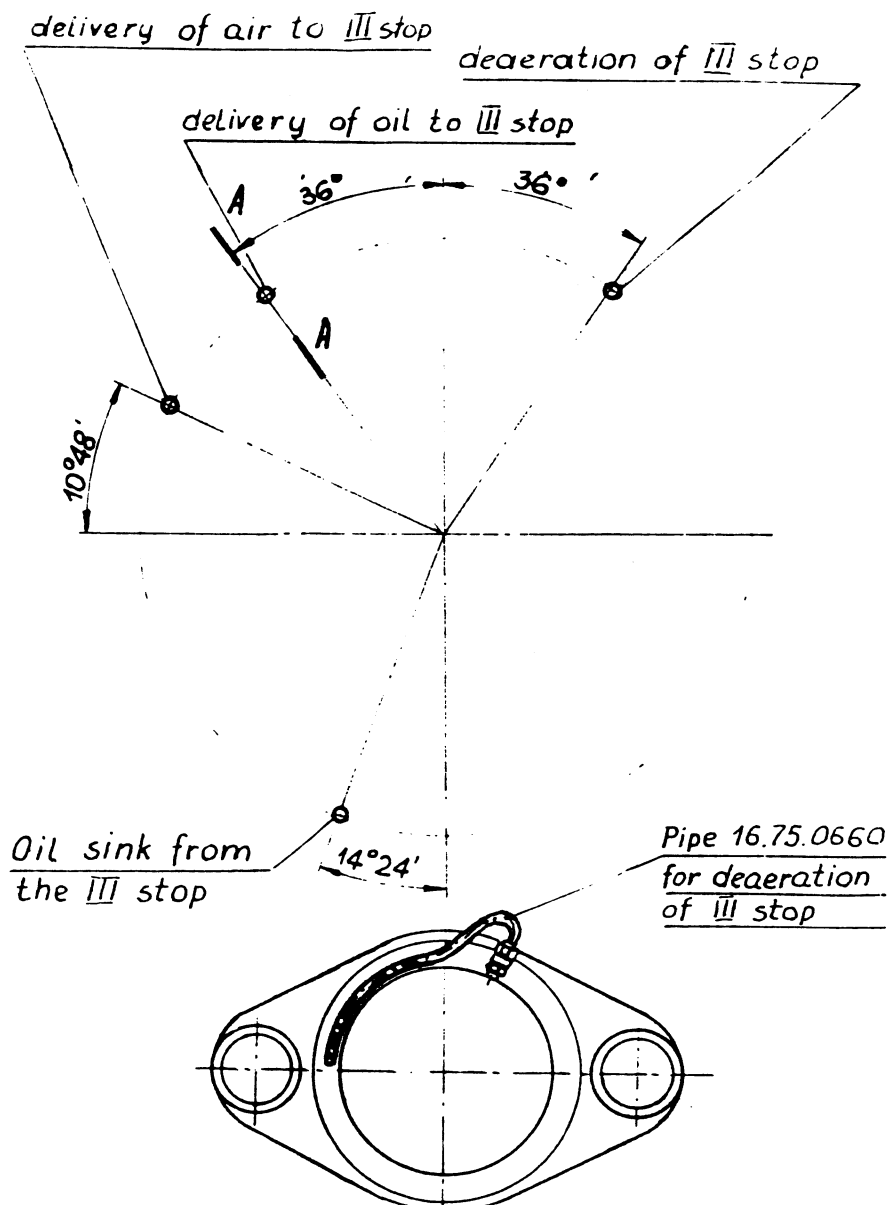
Scheme of sparring of connector pipes for feeding and carrying away oil and air from III bearing assembly.
